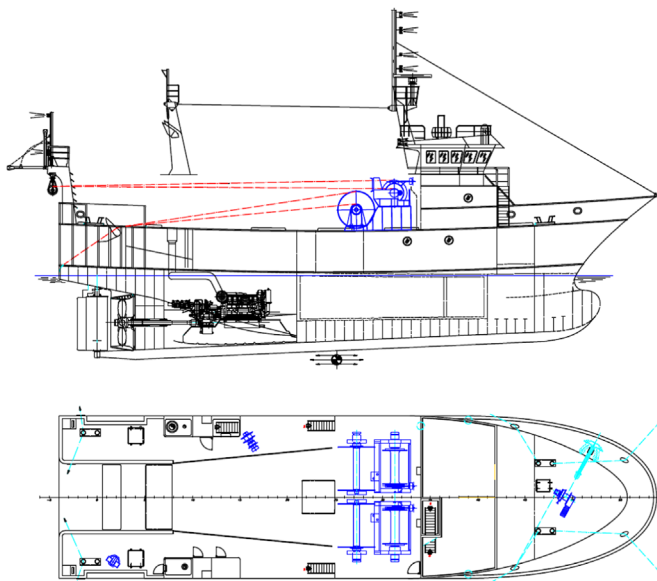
Coastal Trawler. Longitudinal cross-section of the winch and bridge. *Source:* author's own.
